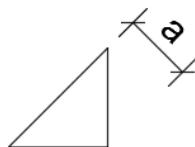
A-dimension indicating fillet weld thickness.
